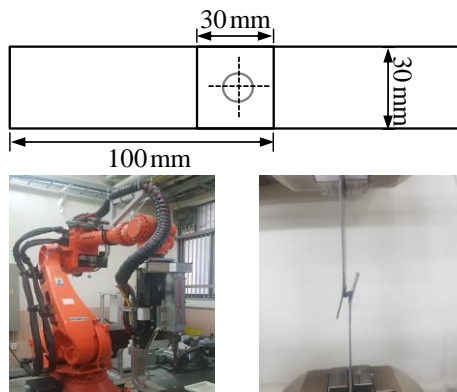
Schematic of welding specimen (top), welding and lap-shear tests (bottom)
